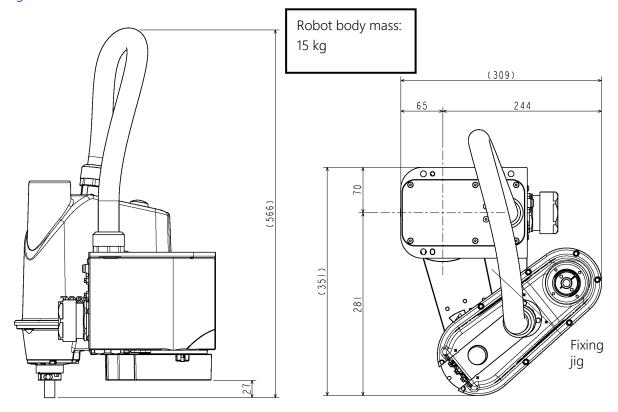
Outer dimensions at transport (KHE400-T)
